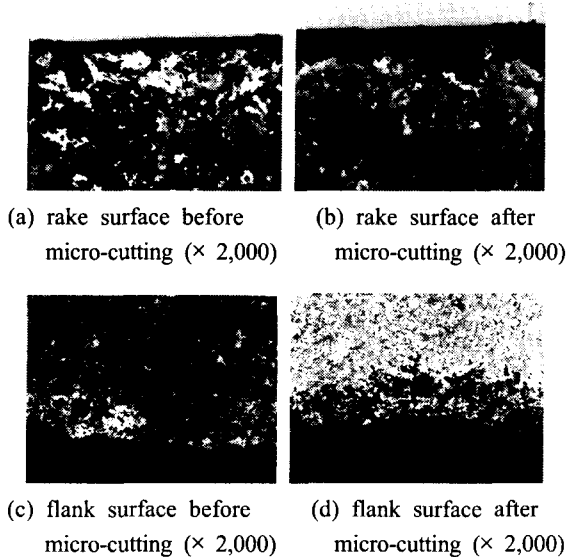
SEM photographs of tool wear shape at Rake and flank surface of PCD tool in micro-cutting of WC-Co after 30mm cutting length [v=10 μ m/s, t=10 μ m, α =12 $^\circ$, β =6 $^\circ$]
